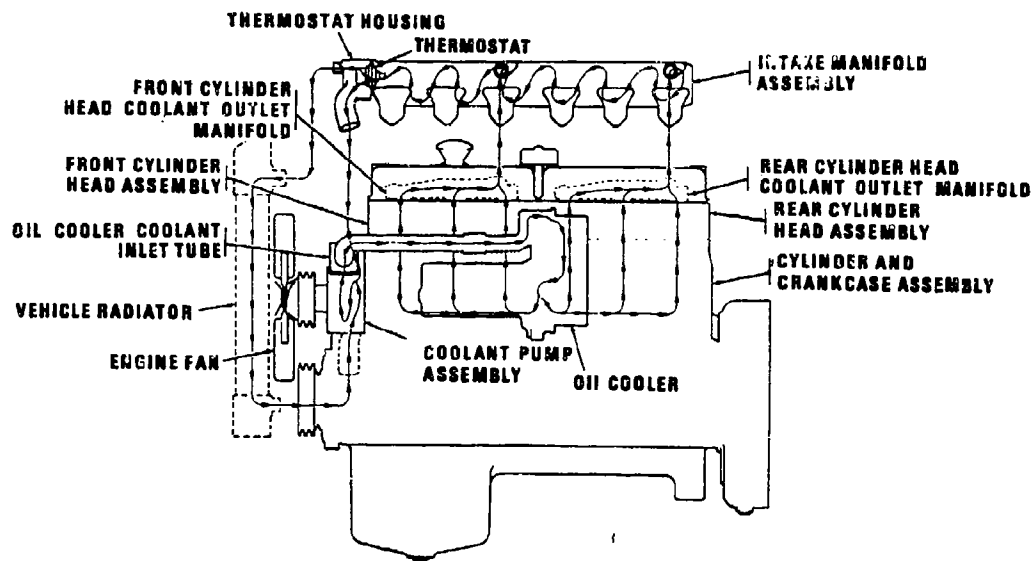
Circulation of Coolant in Engine Coolant Jacket (Ref. 12)
